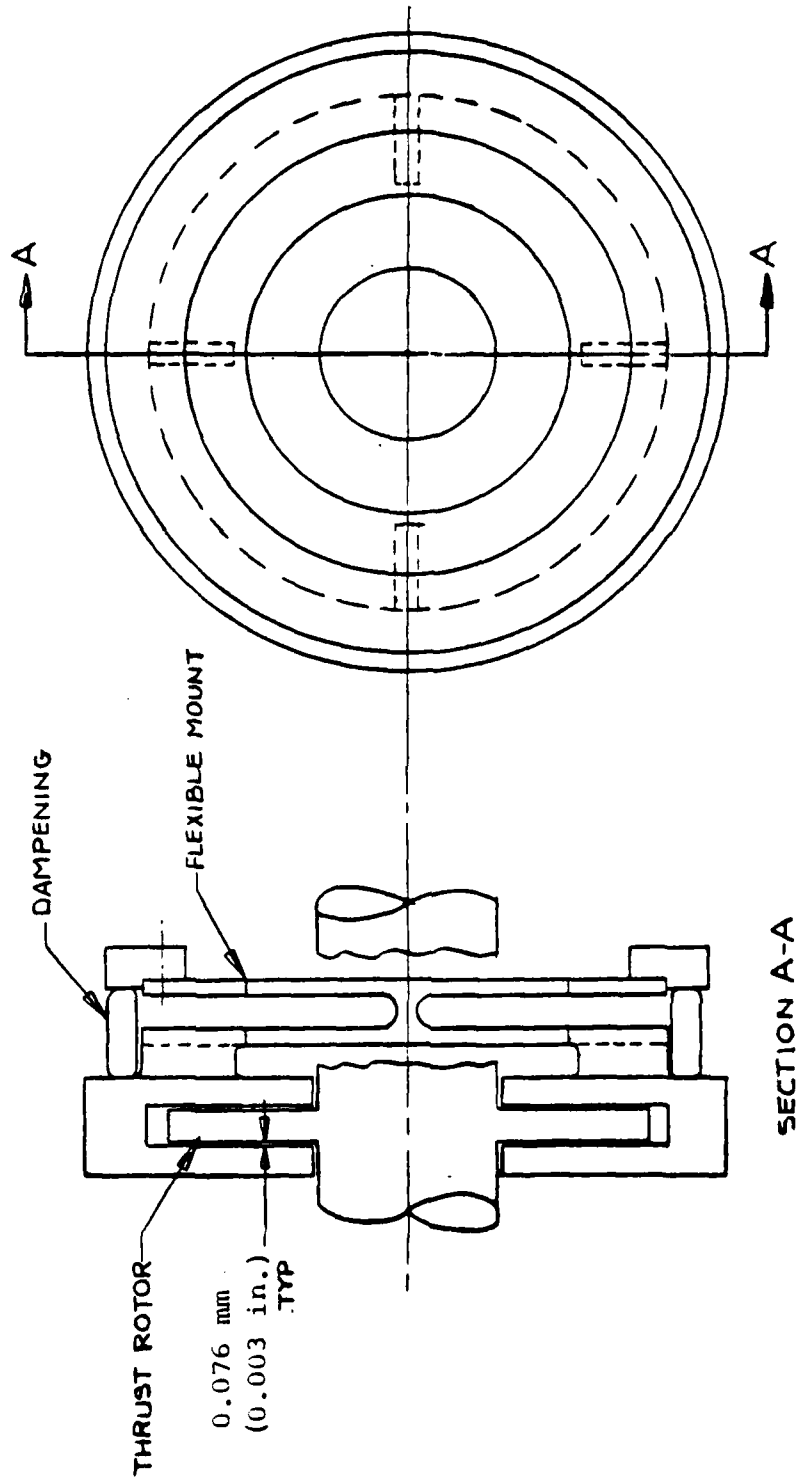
Typical Hydrostatic Gas Thrust Bearing
